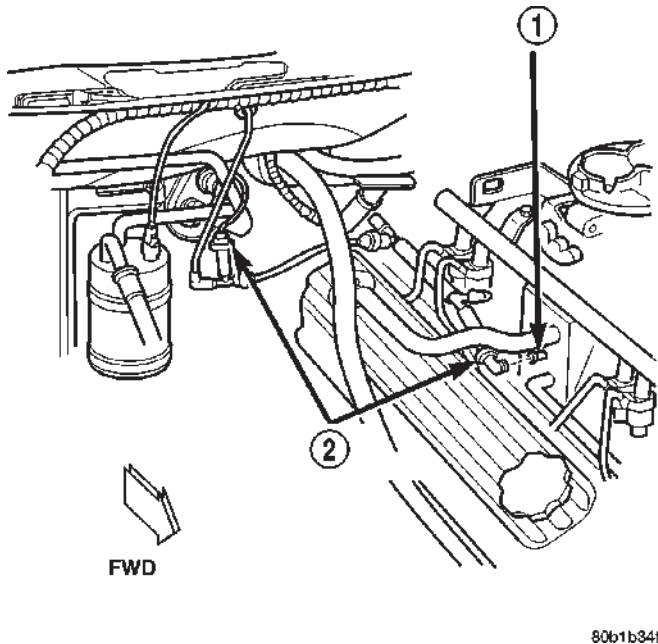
VACUUM CHECK VALVES - GASOLINE ENGINE
